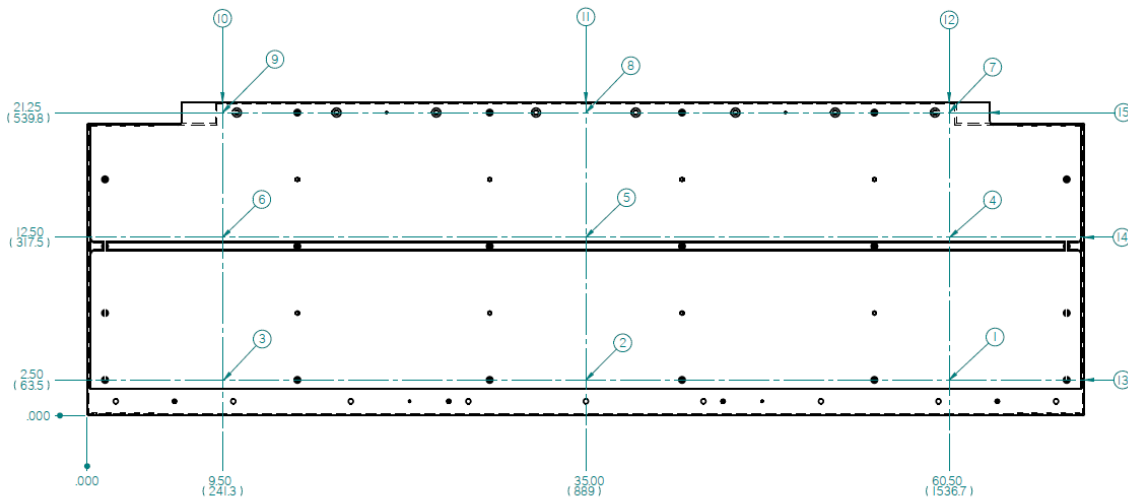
Location of Test Points Taken for Assembled Treadmill Platform.
